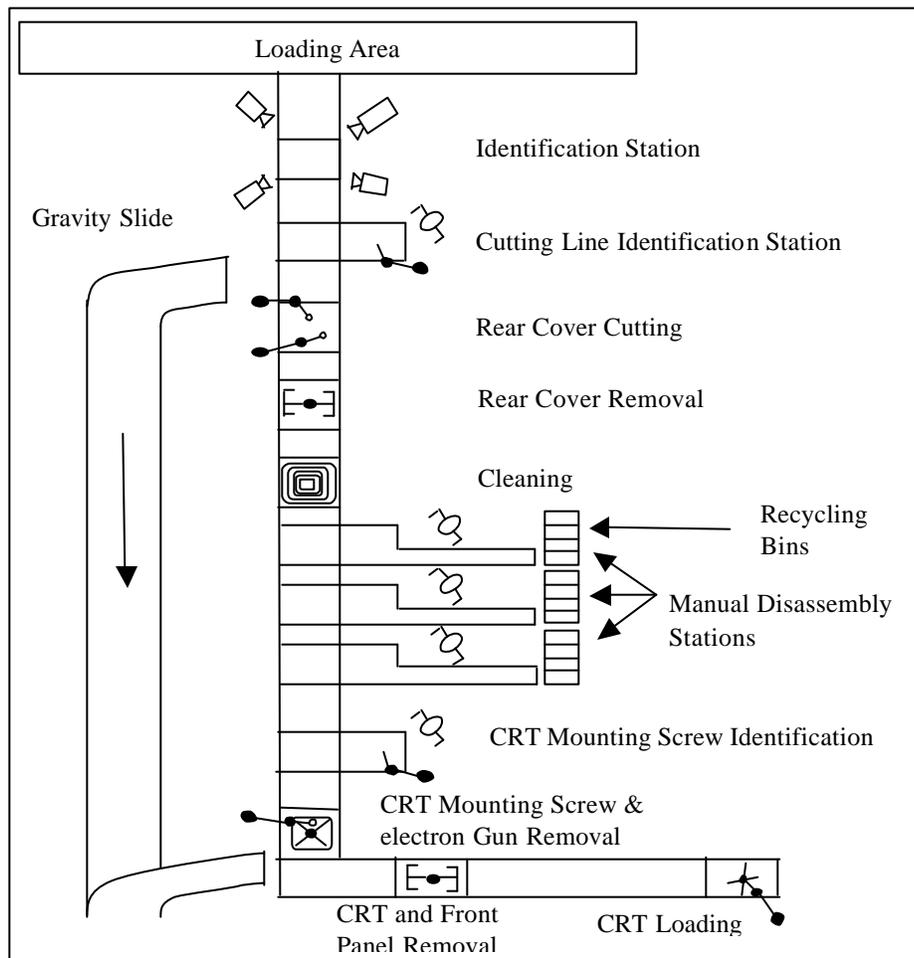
Schematic of one of two parallel TV Disassembly Lines
